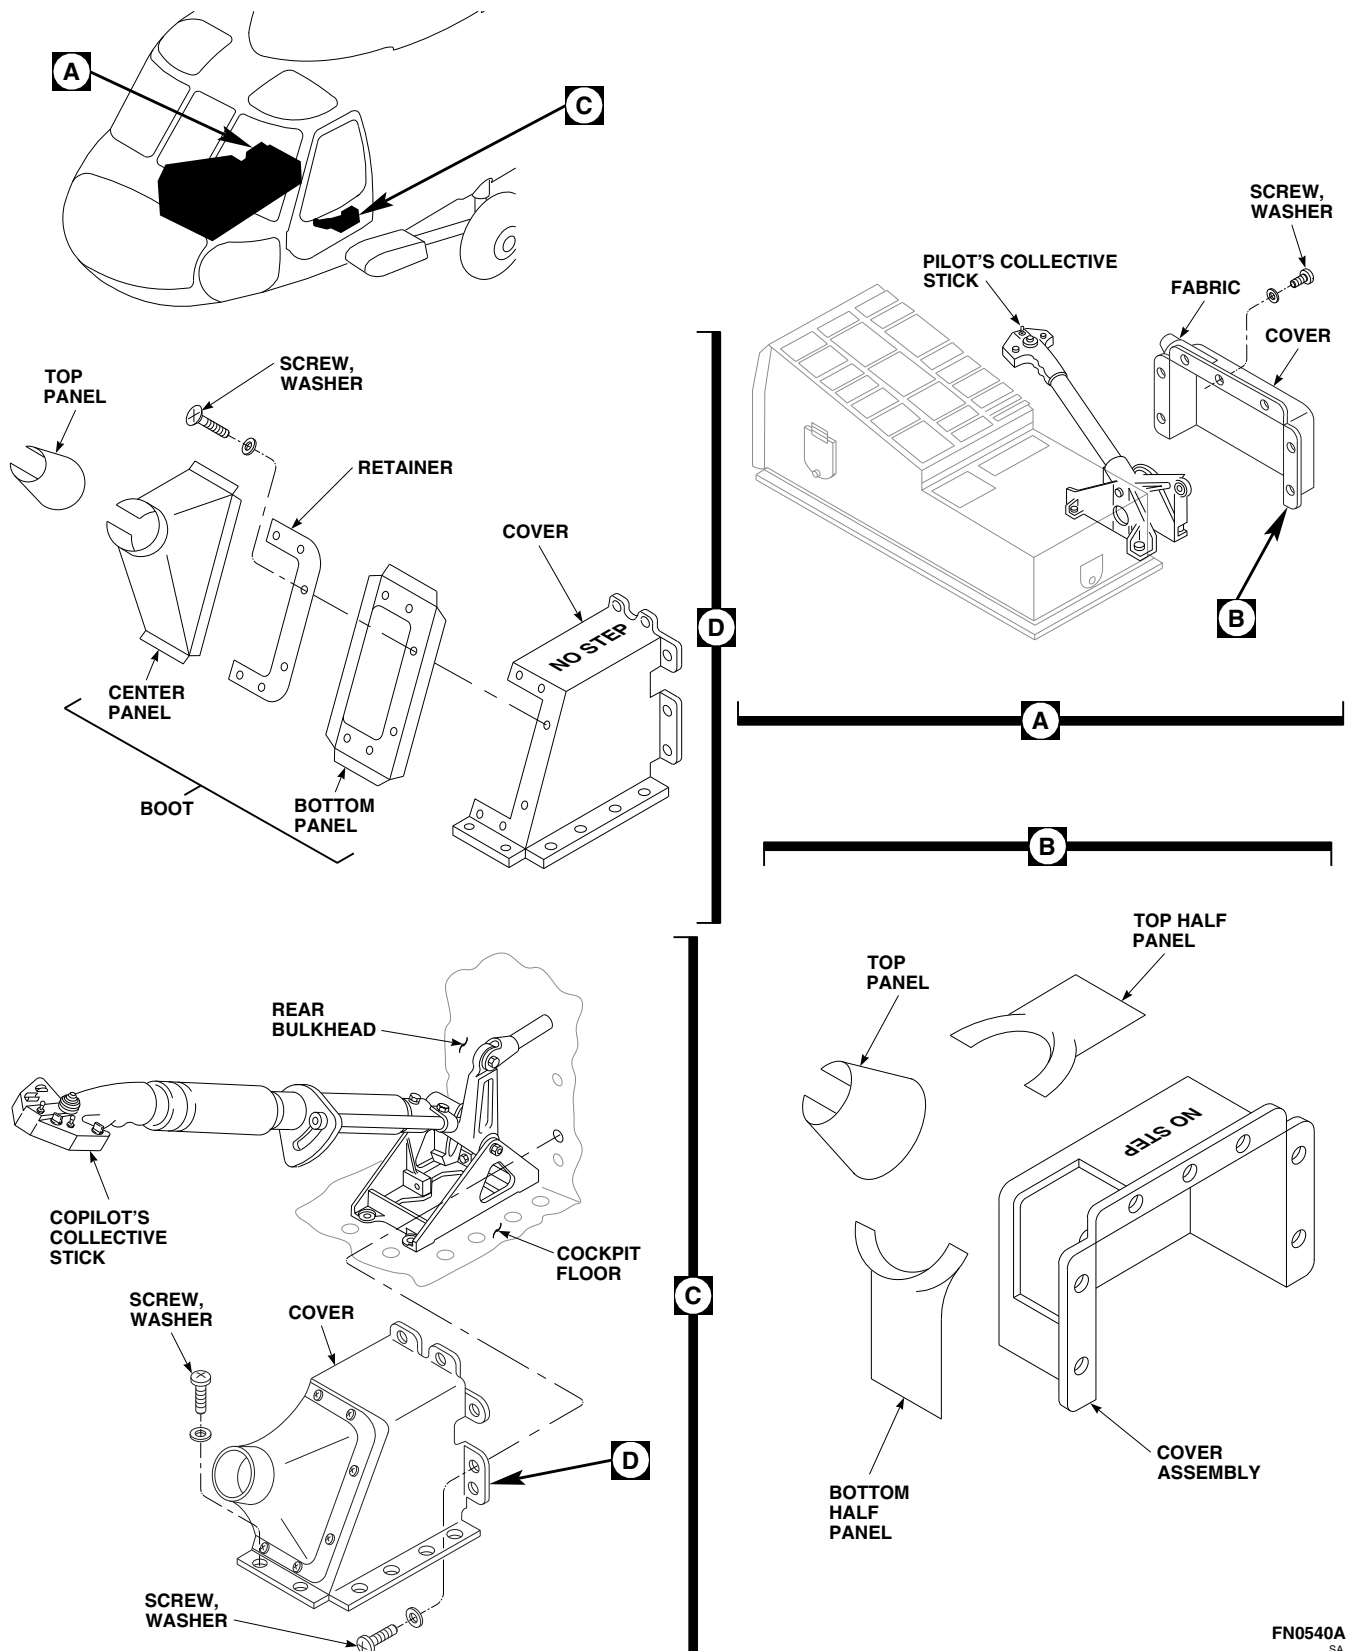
REPLACE COLLECTIVE STICK BOOT AND COVER
